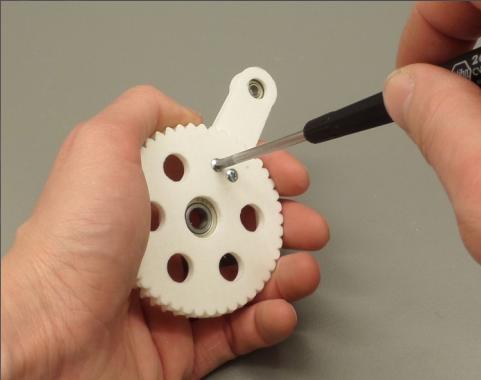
Assemble the gear arm with the secondary gear using M3 nuts and screws.
